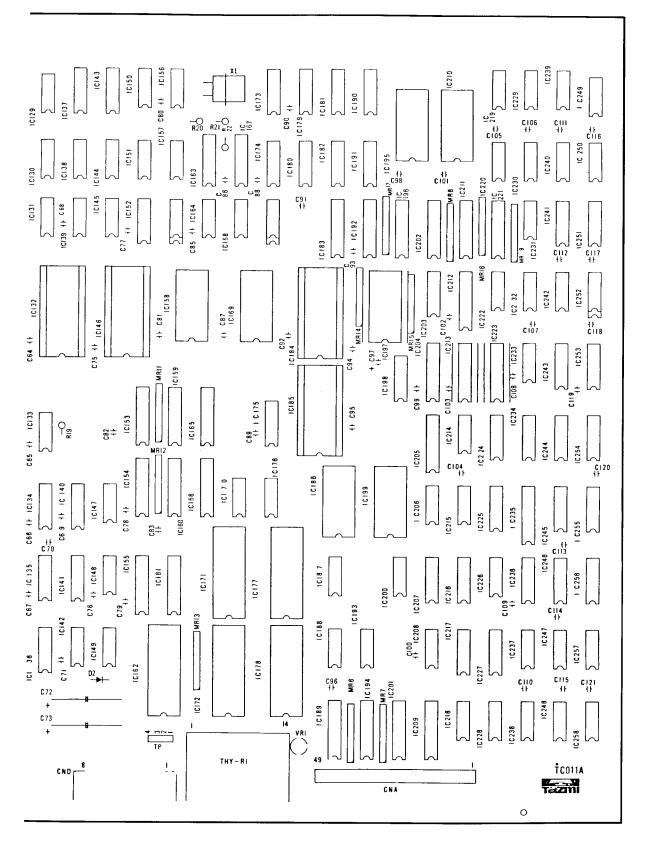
TX-1 Main PCB Assembly, continued A042018-21 A
